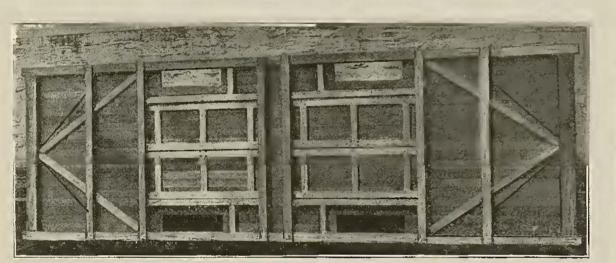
FLOOR FRAMING. (UNDER SIDE, 1895)
